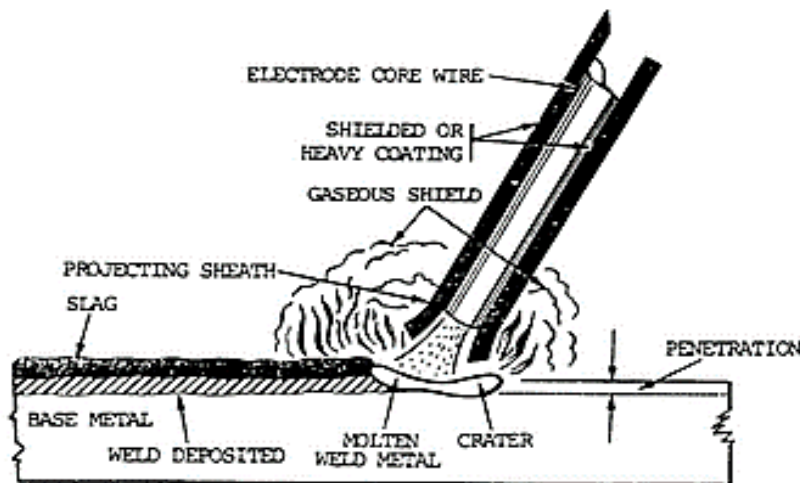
a: Shielded Metal Arc Welding (SMAW)
